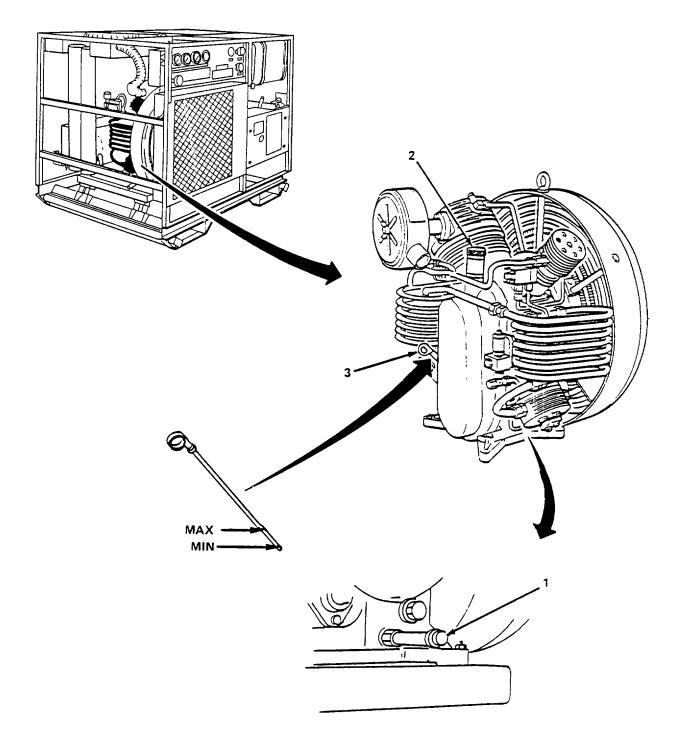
Air Compressor Assembly, Service (Oil Change).
